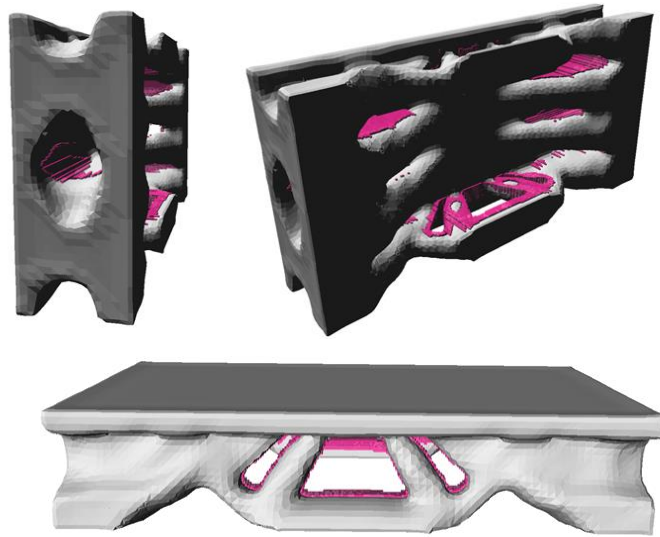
Topology optimized fixture results with non-machinable areas highlighted
